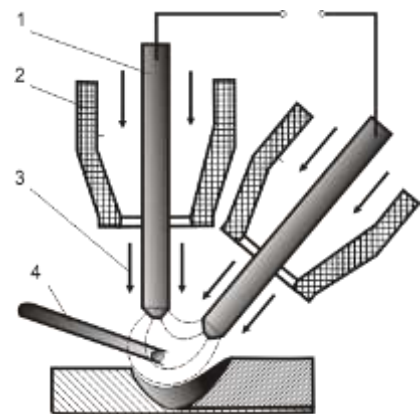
Scheme of atomic hydrogen arc welding
